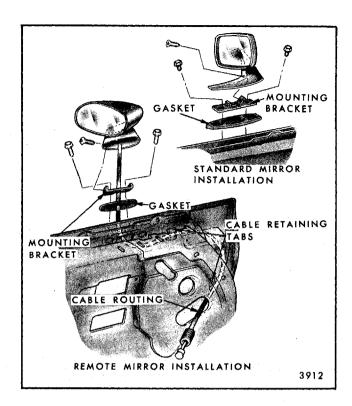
Door Outside Remote Mirror Removal - F, H (less 07,27) and X Styles - Left Side Only
